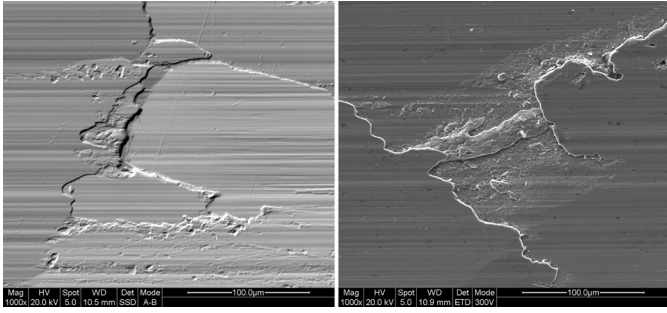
Details of surface irregularities due to chip detach common to all cutting conditions. Radial and axial depth of cut are 0.15 mm for all the tests.
